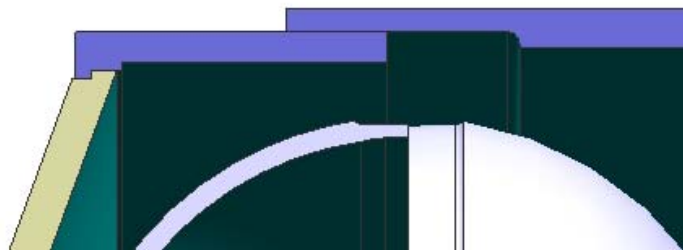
Detail of the Ti He Tank adjustment ring welded to the NbTi cone.
